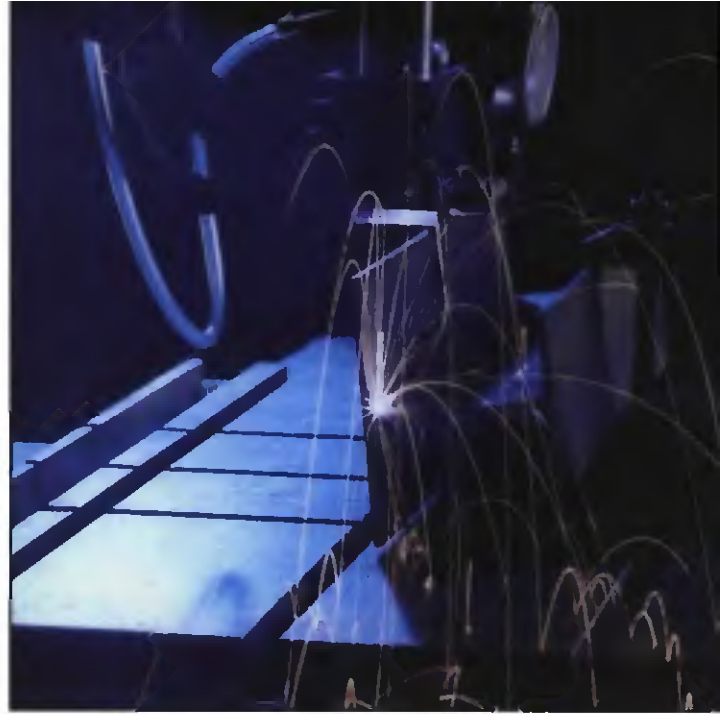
Fiber-optically delivered Nd:YAG laser beams can be used to make welds in aluminum structures. (Edison Welding Institute)
